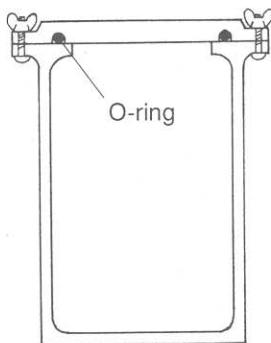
Cross section of a metal container with wing nut tighteners and O-ring seal.
